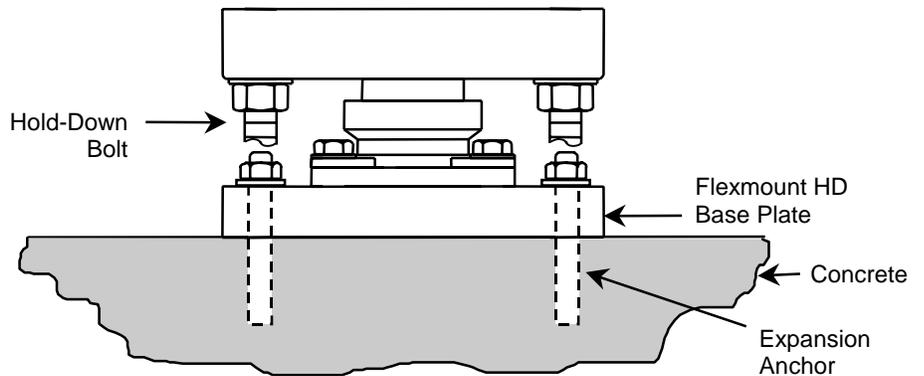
Base Plate Bolted to Level Concrete Floor
